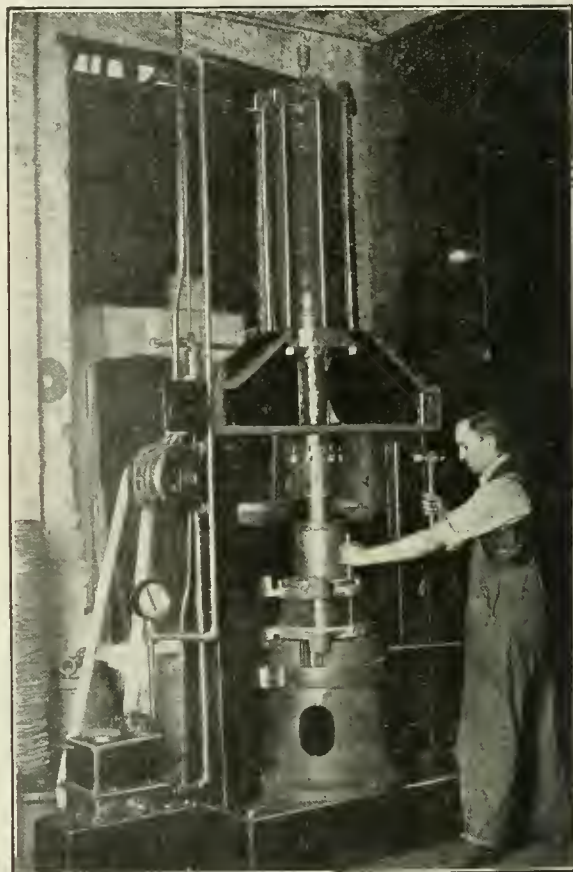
HYDRAULIC PRESS OPERATED BY OILGEAR PUMP
